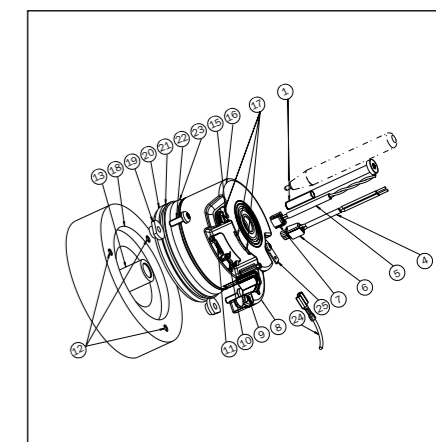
Mounting diagram for conical shaft with elastomer stator coupling
